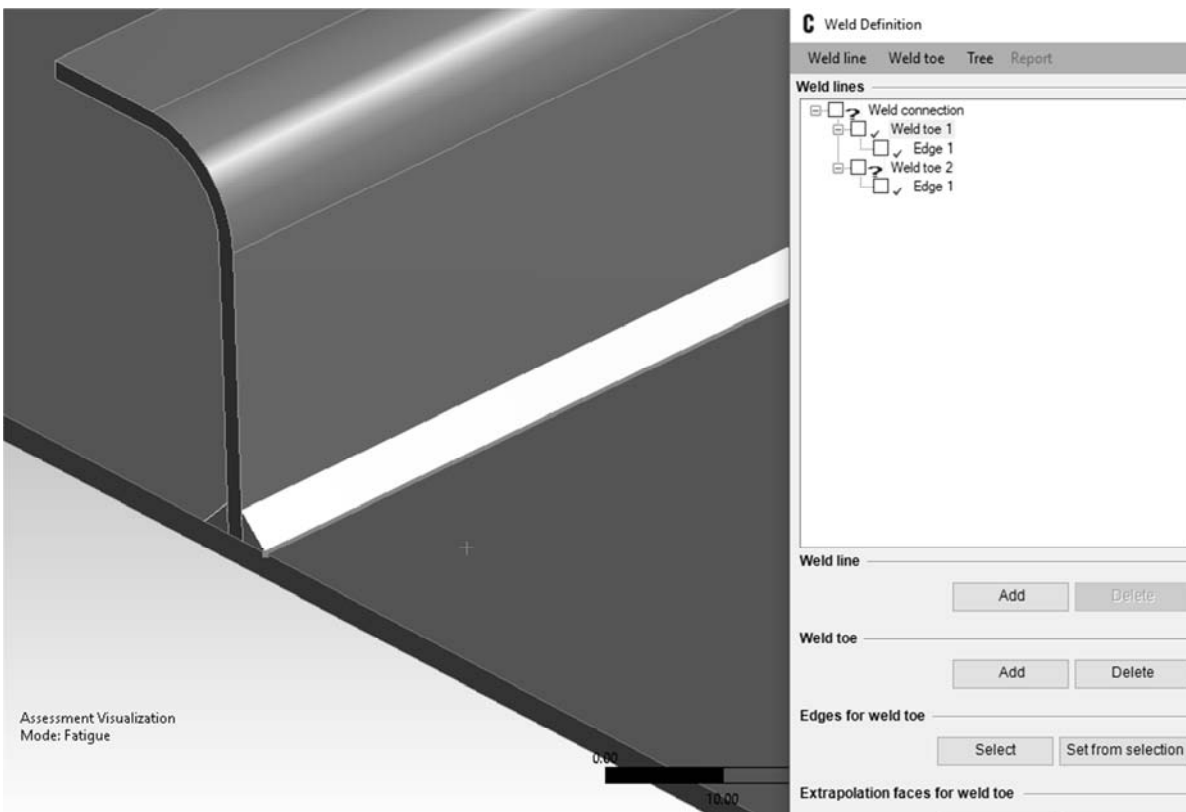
Weld toe and extrapolation surface defined on base metal
